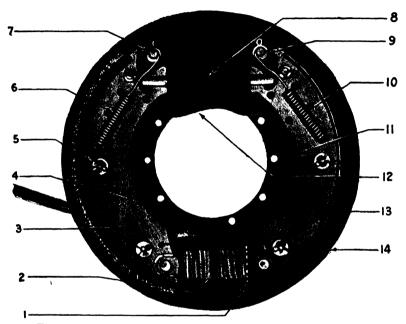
Hydraulic wheel brake with double-acting piston and two anchor pins
